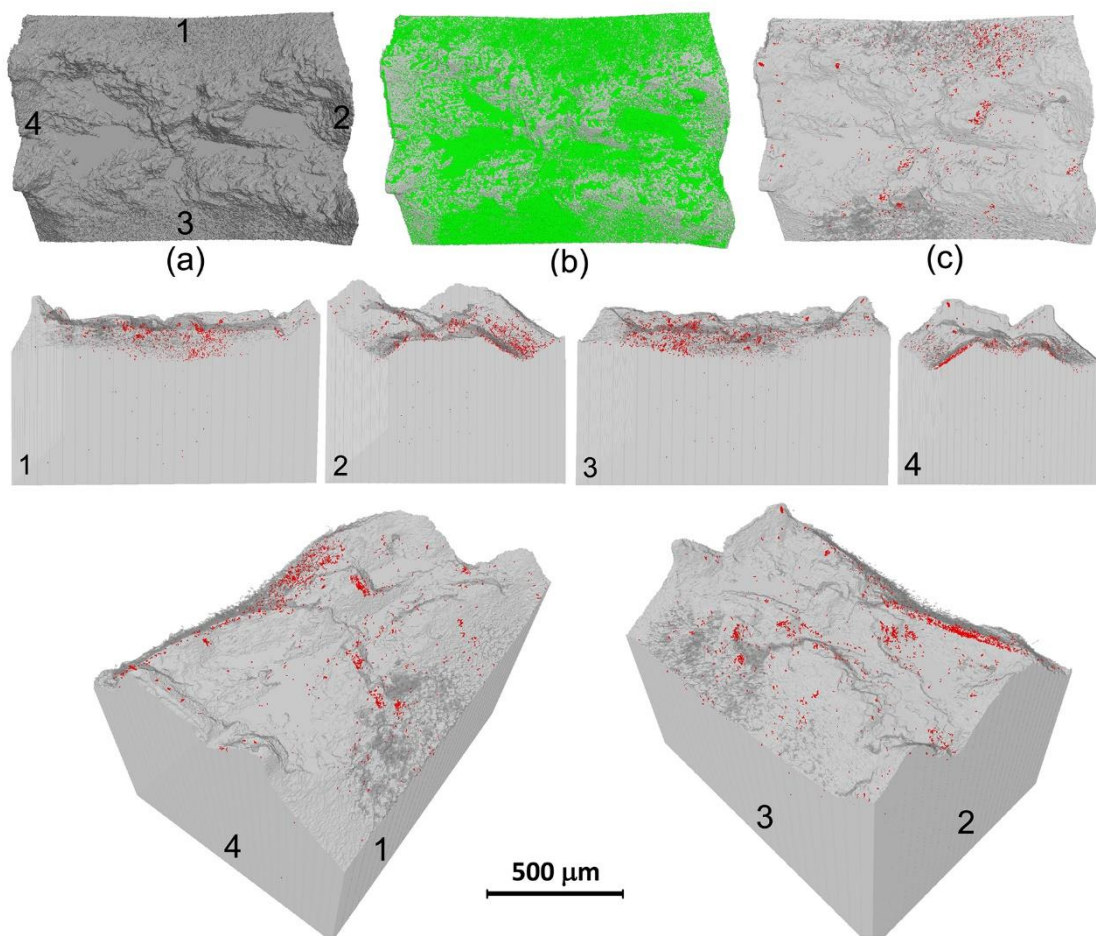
3D representation of the population of dimples or voids in fractured samples of DP-V steel (a) fracture surface, (b) dimples on the fracture surface in green, and (c) voids beneath the fracture surface in red. The 3D model is presented from varied views in the second row and 3D perspectives are shown in the third row.
